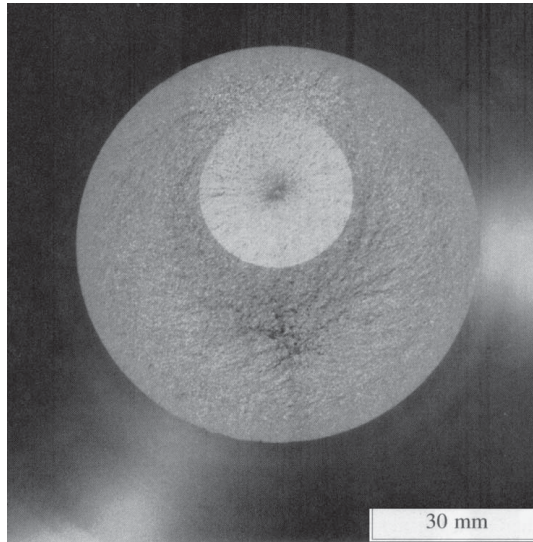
A complete subsurface fish-eye fracture. (Courtesy of Y. Murakami.)
